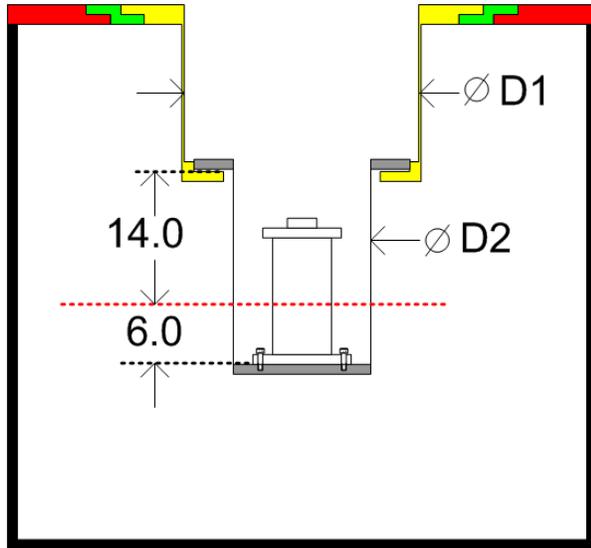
Tank flange nominal dimensions and positions [inches]: Dimensions shown in red are new or have changed since revision 0; see tables below for tolerances; NOTES (1) outer diameter of *Tank-Reducer-D16* was decreased by one inch for consistency, so that OD-ID=5 inches on all flanges; this adaptor flange may alternately be designed to interface directly with largest; (2) newly added larger flange *Tank-Flange-D39* will accommodate compensated magnets; (3) new stepped designs puts all sealing surfaces 29.5 inches about the beam center
